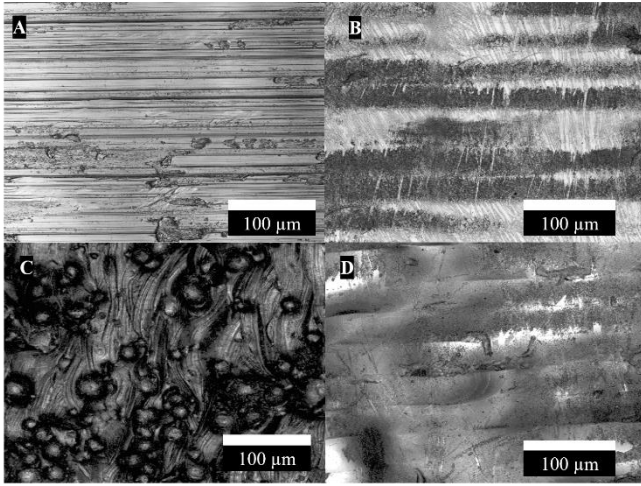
Confocal microscopy of conventionally machined (top) and LPBF (bottom) surfaces before (left) and after (right) laser polishing.
